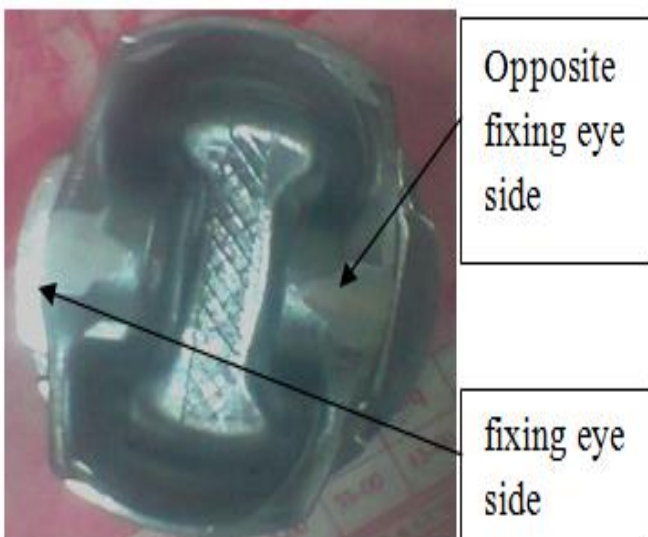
Piston showing Fixing eye and opposite fixing eye side
